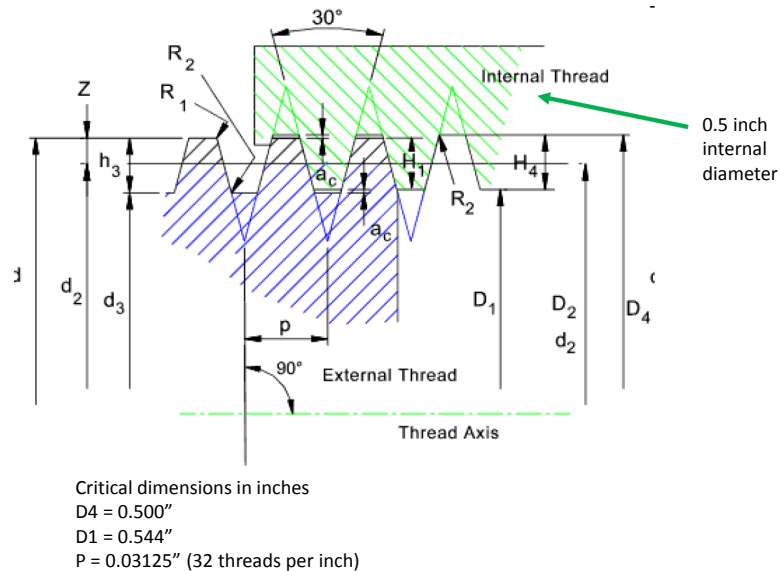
The trapezoidal tap dimensions used for fabricating corrugated waveguide sections.
